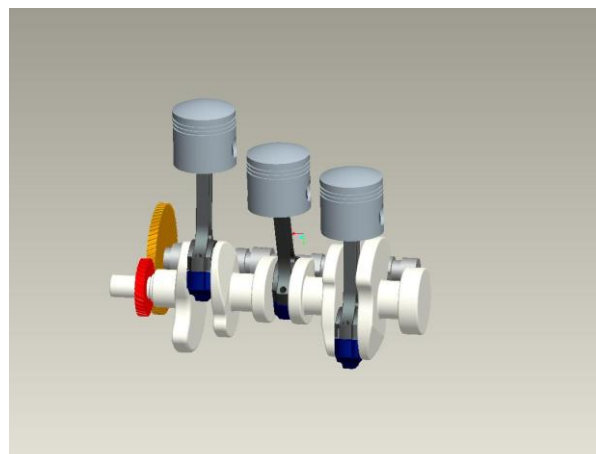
Complete Assemblies Made In Pro-E Wildfire 4.0
